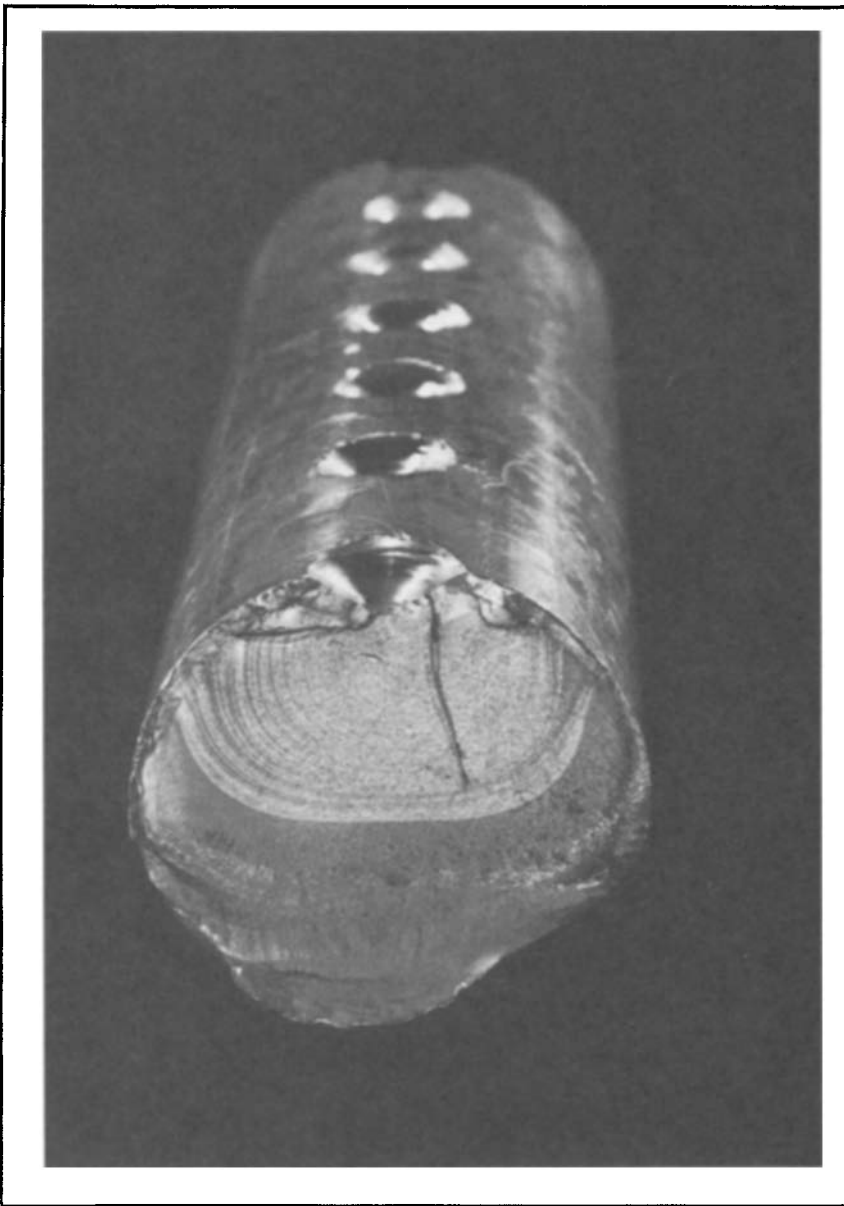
Oyster shell markings on fatigue failure fractured surface from a 2024 alloy shaft, from a spool used to coil papers. Fatigue checks initiated from each of the shallow reference holes used to position flanges on the shaft. (Courtesy of Alcan International, Kingston Laboratory)
